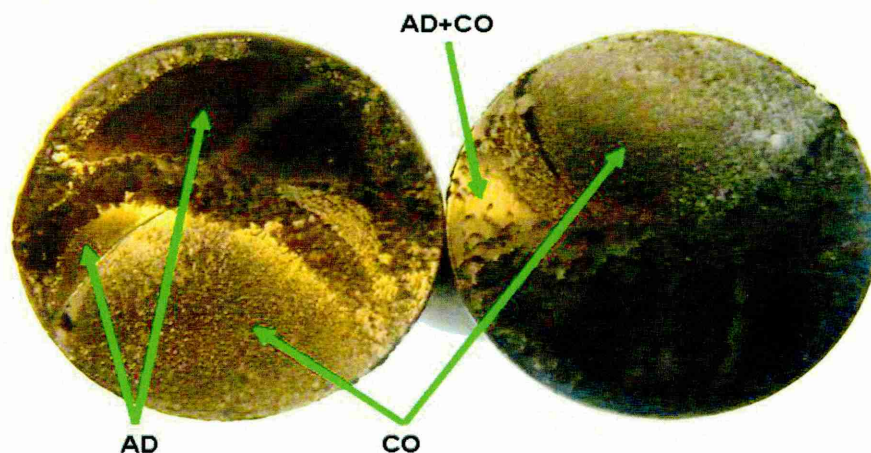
adhesive fracture surface of SG3 on mild steel (Butt joint)
